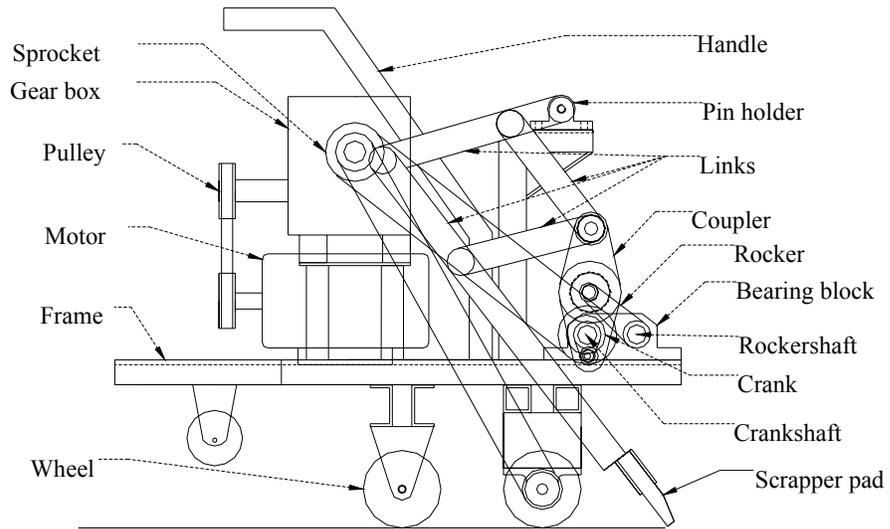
AUTOCAD assembly drawing of the Carpet Scrapping Machine
